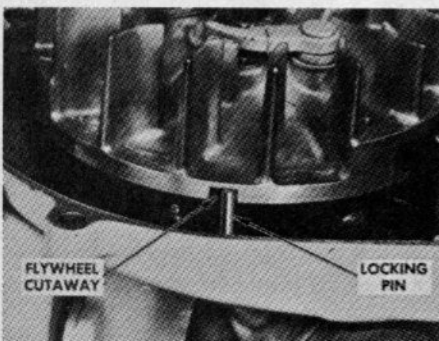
Flywheel can be locked in position by inserting a pin into cut-out of flywheel.
